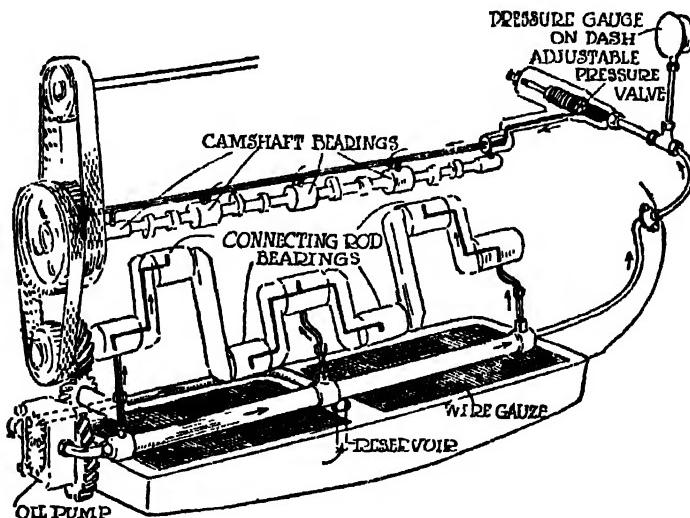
Oiling System of Cadillac 1915 Eight Cylinder Engine.
